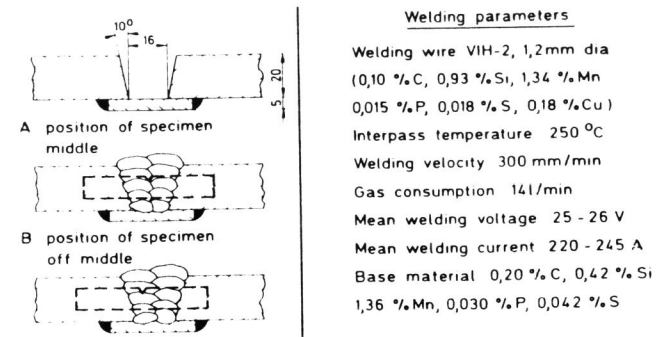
MAG-welding:Preparation, position of specimens and welding parameters
